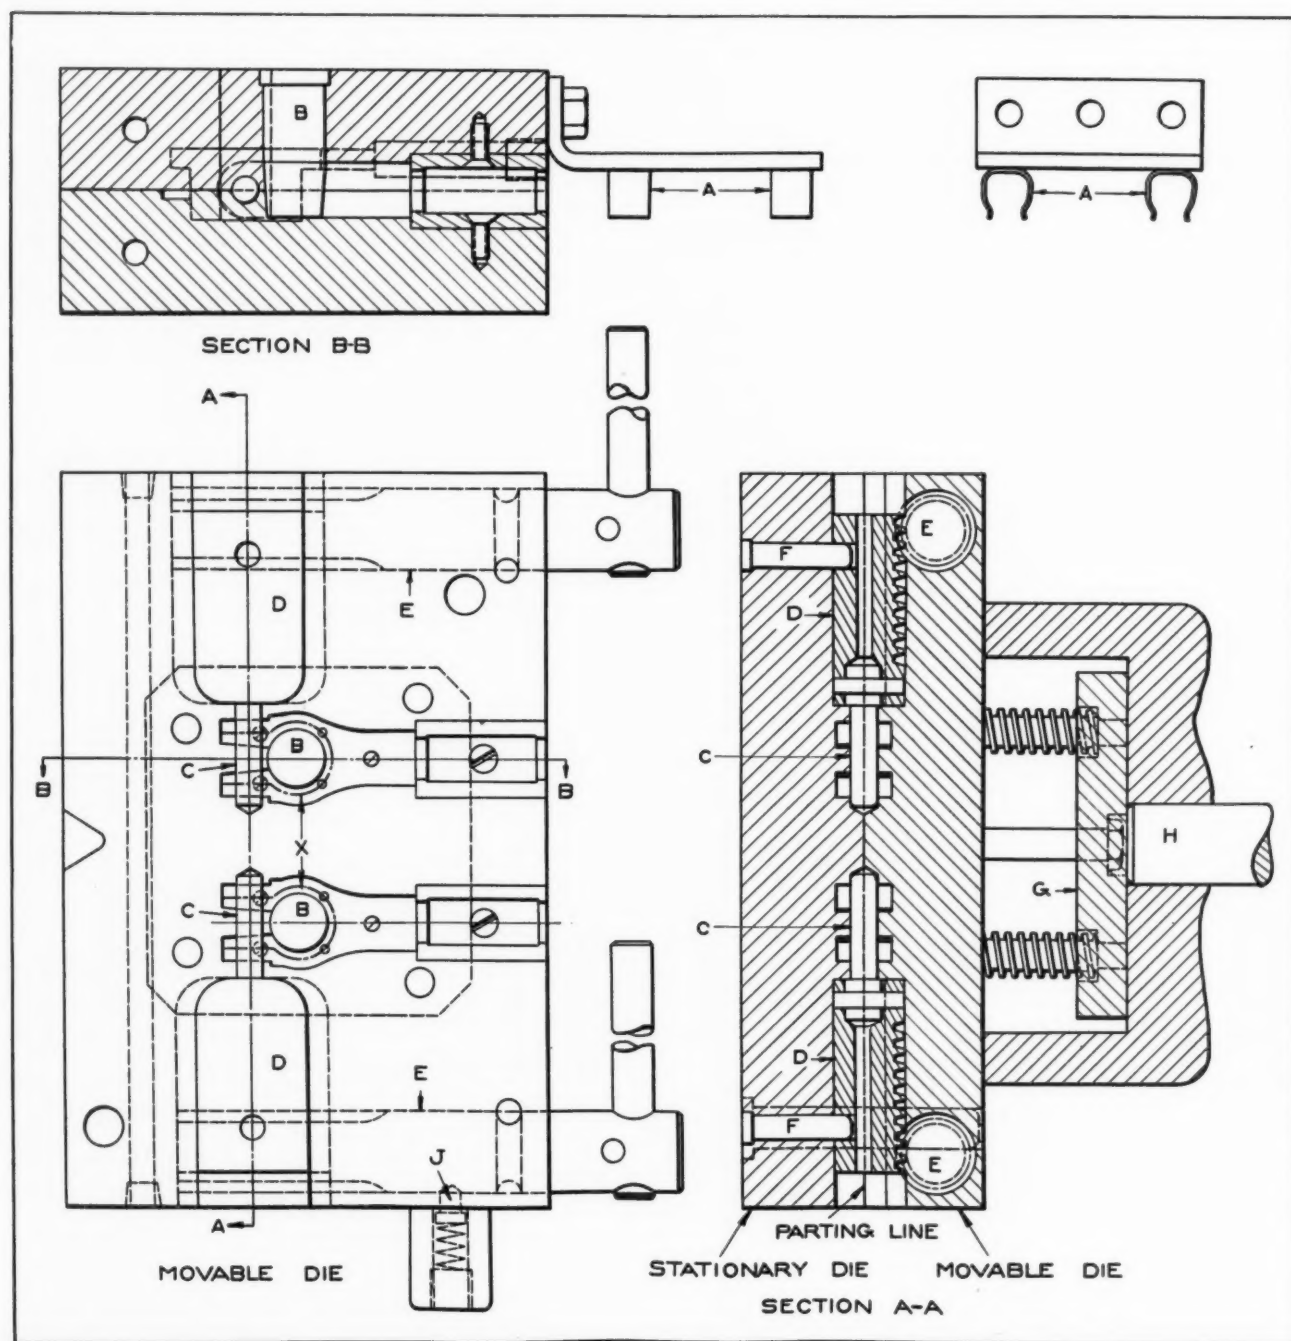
Dies Designed for Casting Lead Terminals on the Ends of Insulated Wire Cables
